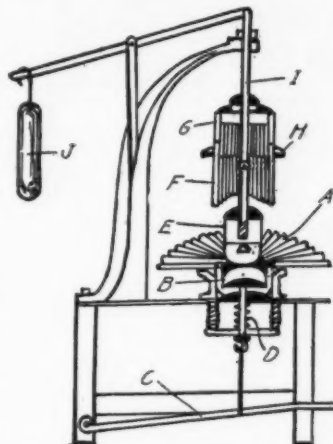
PLEATING AND FORMING MACHINE, OPEN.
